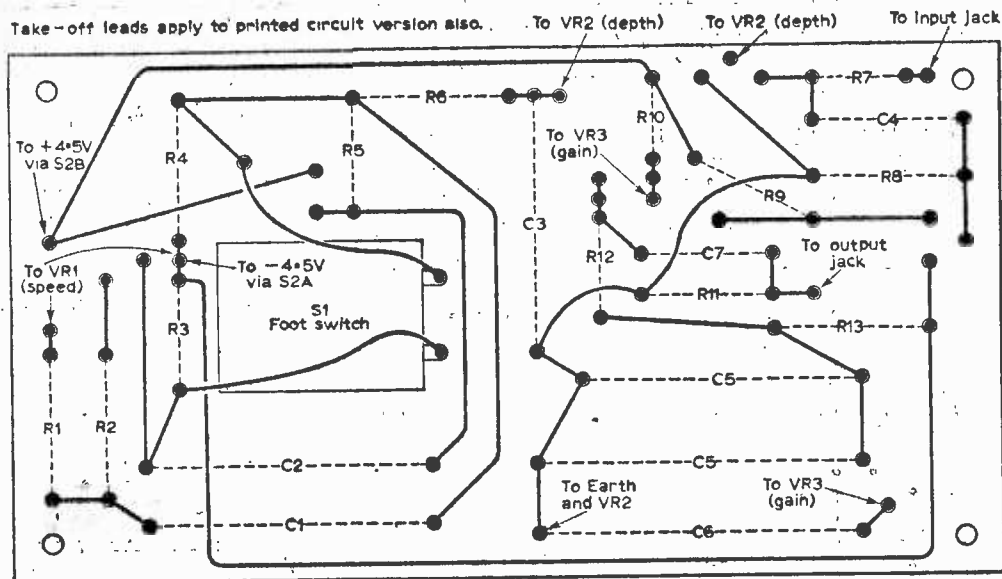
Point-to-point wiring for a component board using tags fixed into a plain sheet.
